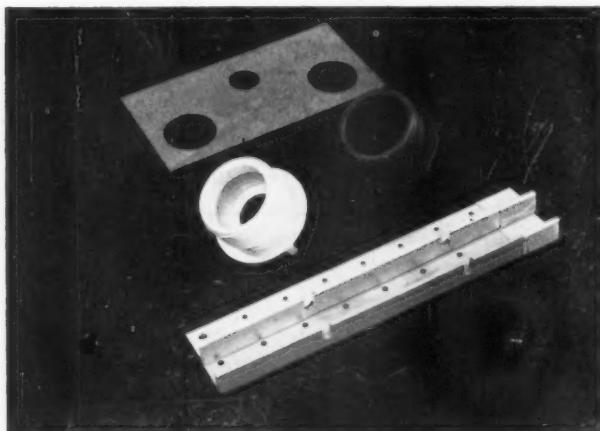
Some of the many parts that have been treated in the new hard-coating process. Upper—cast aluminum; middle—machined aluminum; lower—extruded aluminum.
